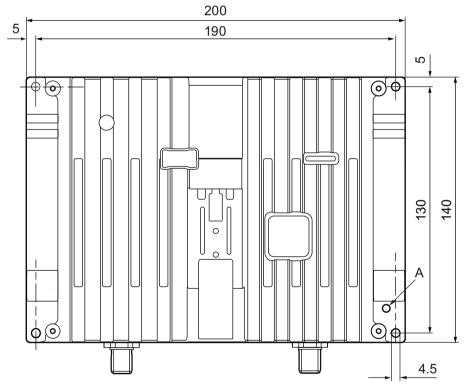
Drilling pattern for the RF285R (dimensions in mm)
